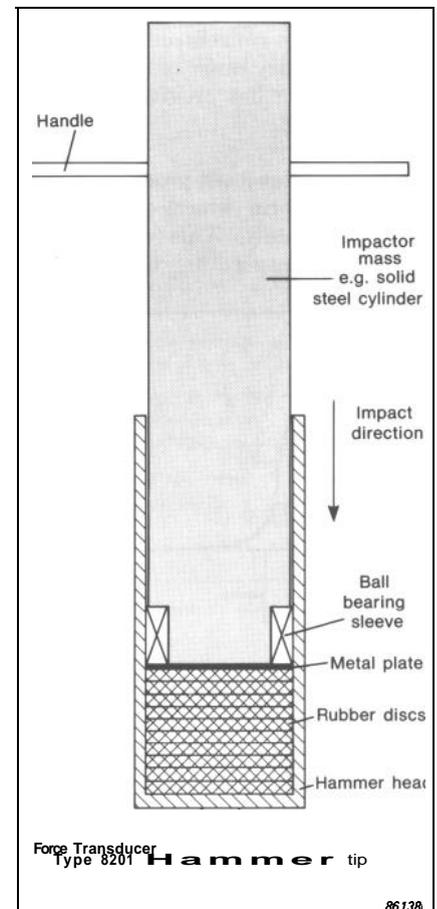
Assembly drawing of a large impactor using the Brüel & Kjær Force Transducer Type 8201
